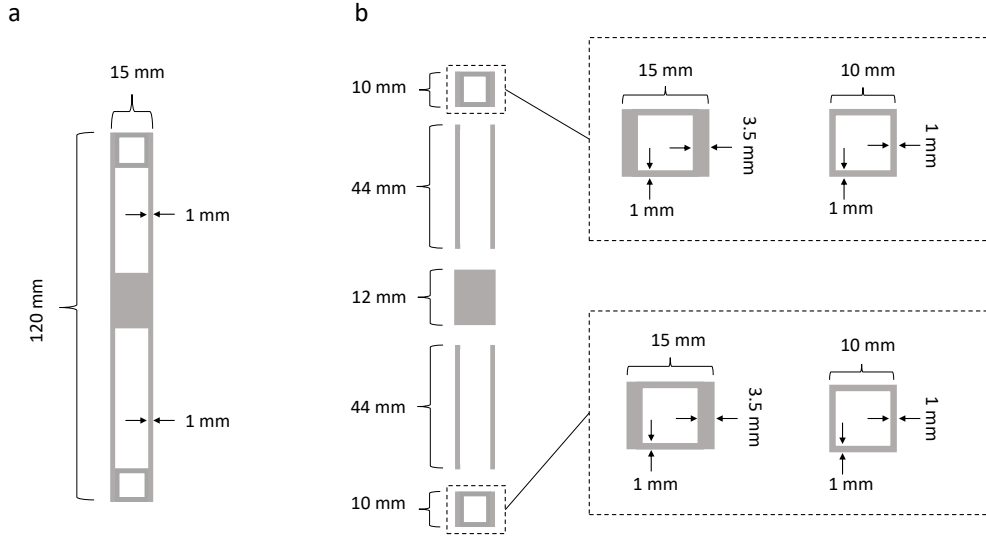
|Frontal view of the frame. The frame is shown as a whole in a and segmented into five parts in b, with the extrusions being further segmented. The dimensions of the separated parts in the zoomed-in views of both extrusions corresponds to $p3$ and $p4$, respectively, in Fig. 6.4b.
